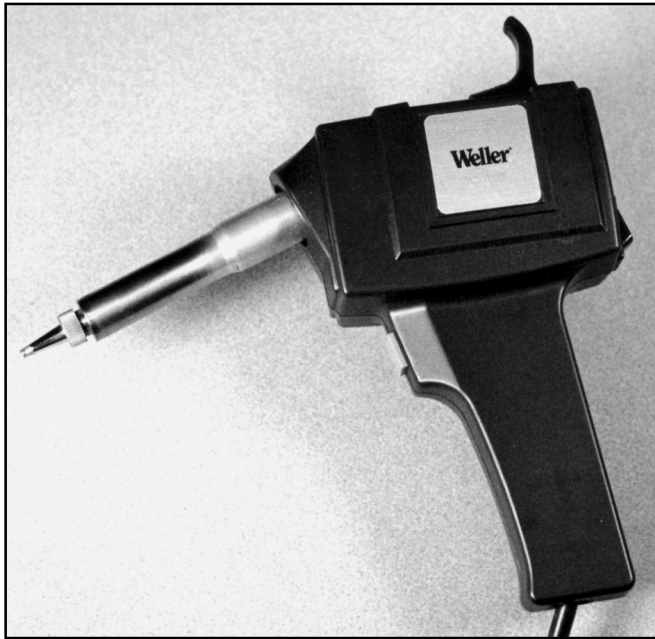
The Weller SCD100 makes continuous-vacuum desoldering affordable.
